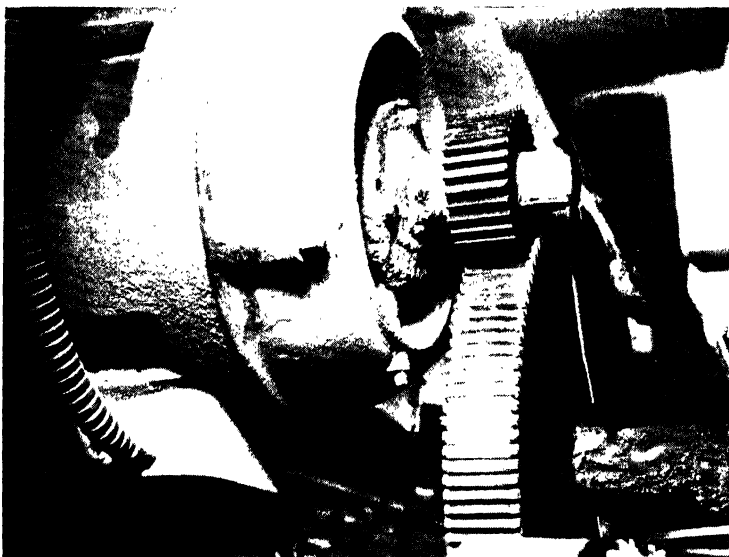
Use of laminated gears in rolling mill<sup>11</sup>
